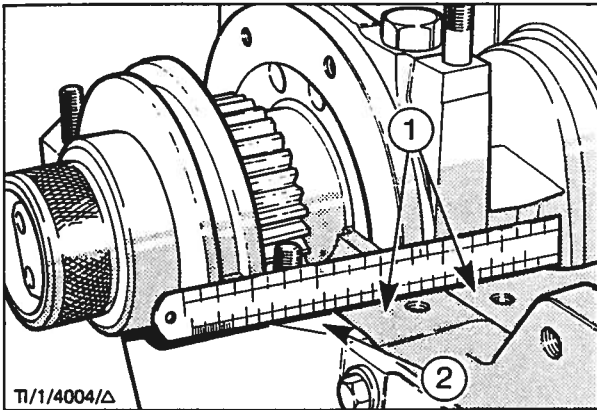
Timing Gear Housing and Cover Alignment (Right Hand Side) on 2728T Engines)
